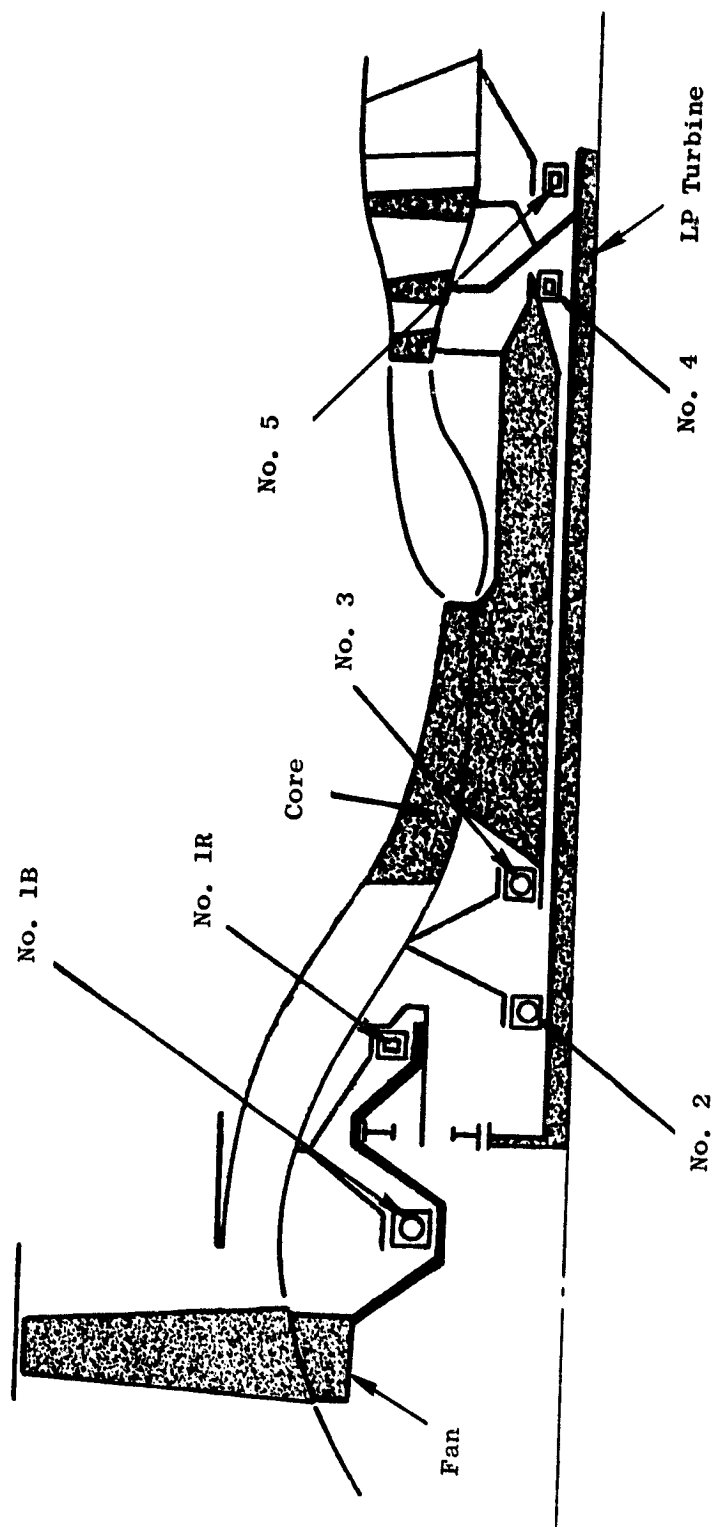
Schematic of OTW Engine Bearing Arrangement.
